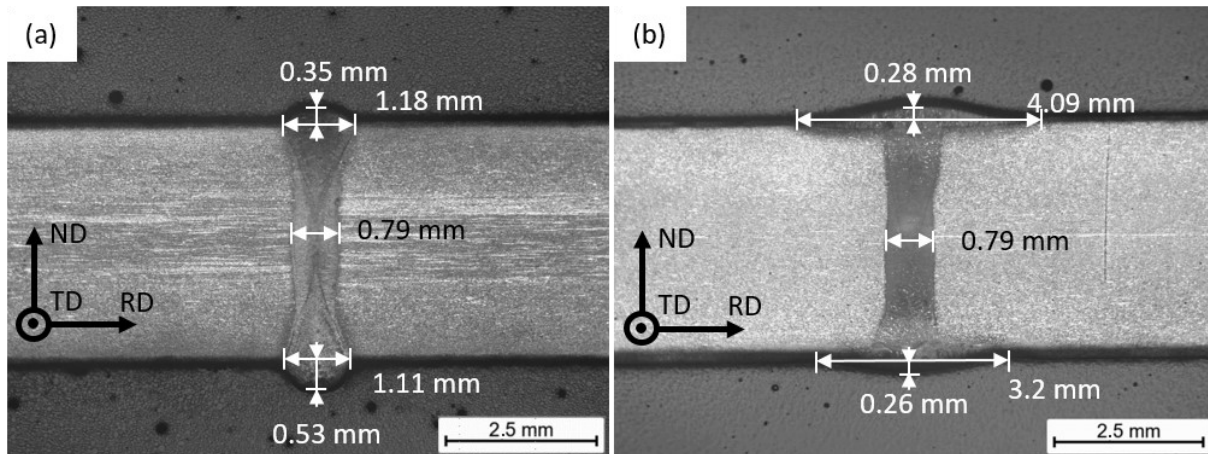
Macrographs of the tests section containing weldments. The samples were etched for approx. 4 seconds with Beraha II etchant. a) Test section of a fatigue-specimen in the as-welded condition, b) test section of a fatigue-specimen in the laser-surface-remelted condition. [19]
